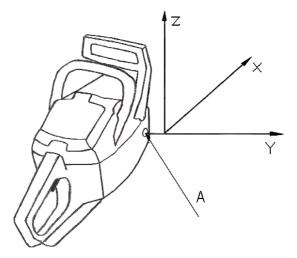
Measurement directions of bearing clearance and vibrations on engine body: X – parallel to the guide axis, Y – parallel to the engine crankshaft axis, Z – parallel to the cylinder axis, A – the point of sensor fixing during vibration measurements on the body
